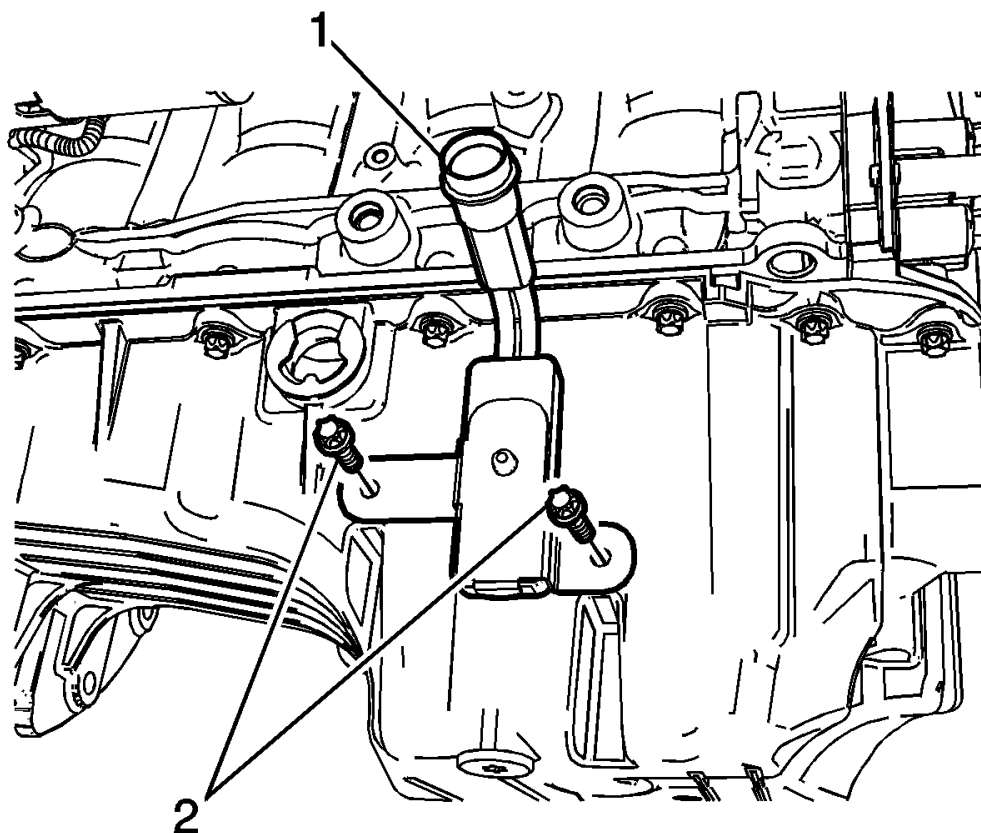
Oil Pan Heater, Mounting Bolts & Injector Cable Connector
